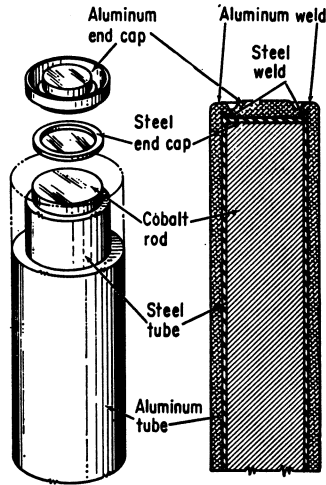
Exploded and cross-section view of an encapsulated cobalt rod
